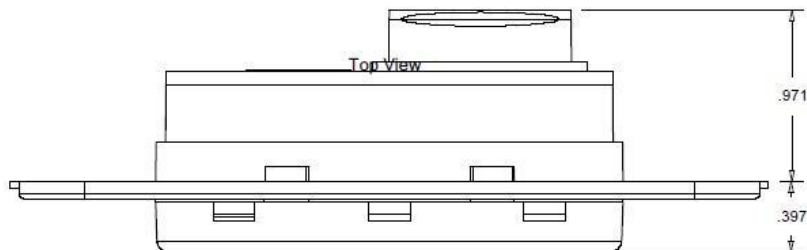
EasyTouch Display Top View Mounting Dimensions
